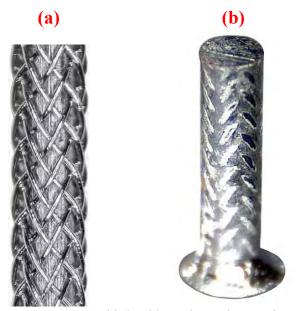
(a) Copper Braided Solder Column shown prior to solder coating. (b) Braided Solder Column (after solder coating) with solder fillet mounted to a BGA pad.
